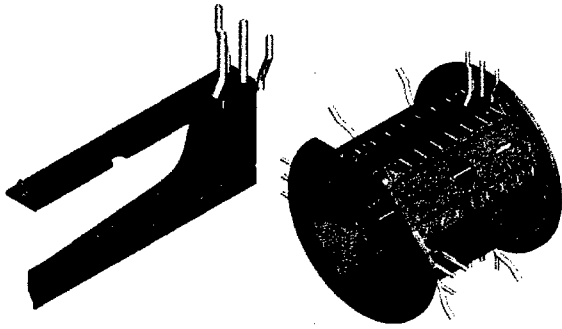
Segment details with cooling channels. The vane assembly is shown separately on the left.
